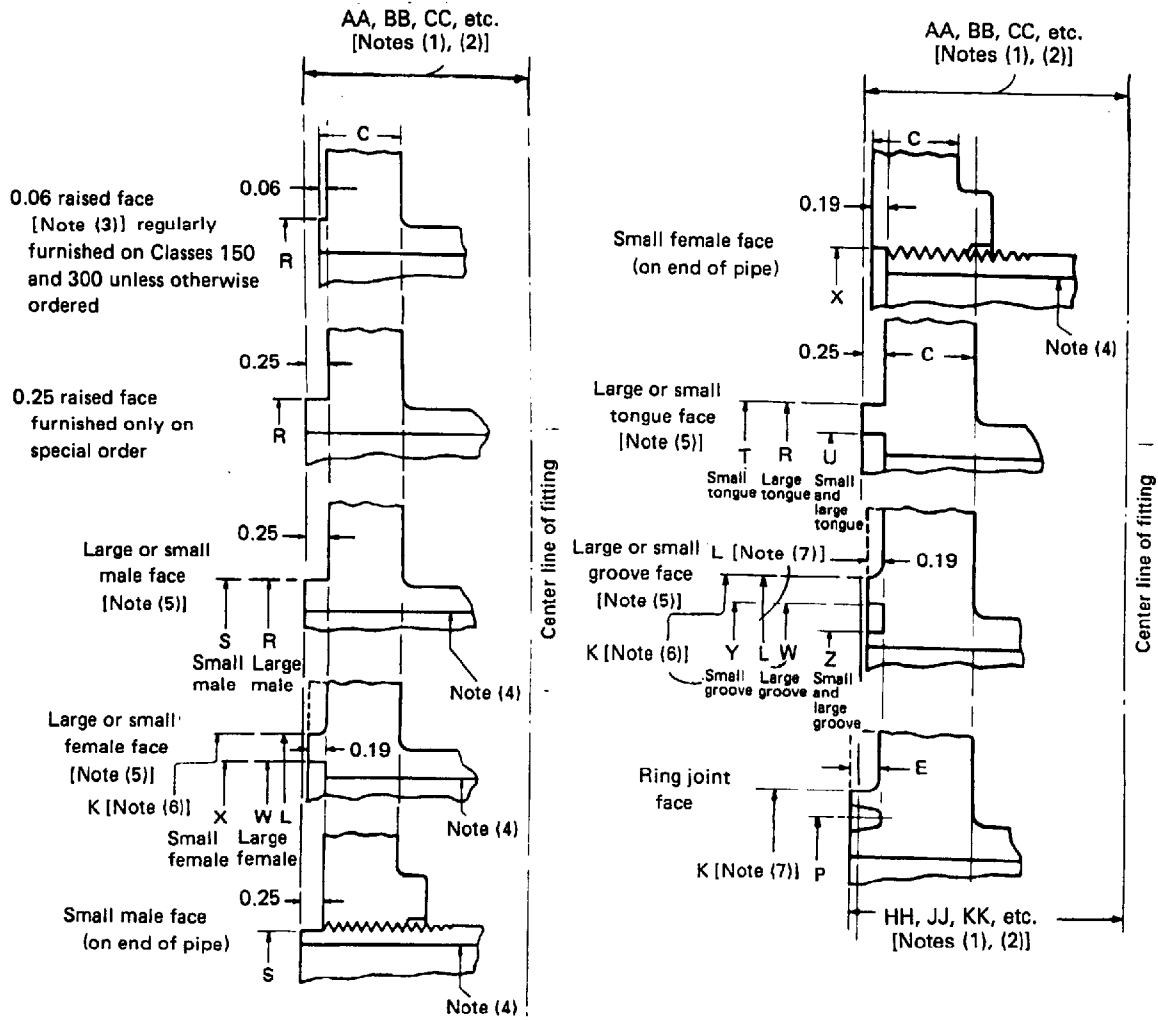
END FLANGE FACINGS AND THEIR RELATIONSHIP TO FLANGE THICKNESS AND CENTER-TO-END AND END-TO-END DIMENSIONS^{1,3}
